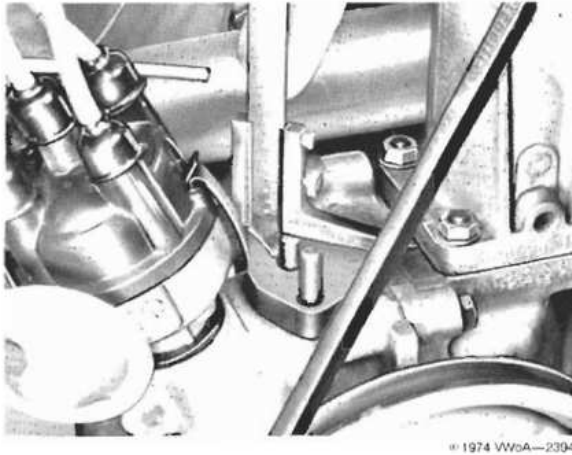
Depth gauge being used to check length of pushrod where it projects from intermediate flange.
